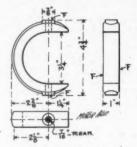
Cone Clutch Yoke. 1—Phosphor Bronze.
